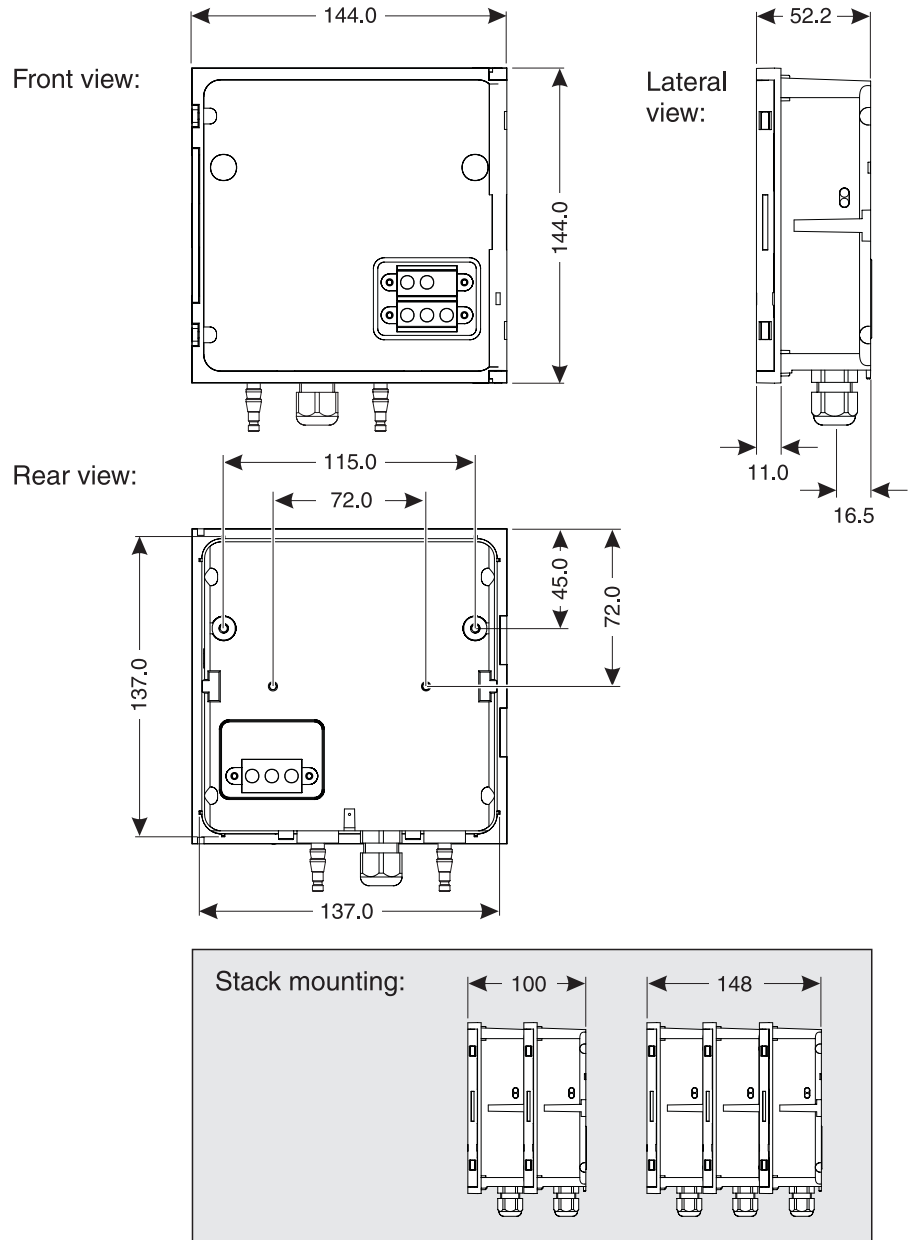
Dimension drawing of the MIQ/CHV (dimensions in mm)
